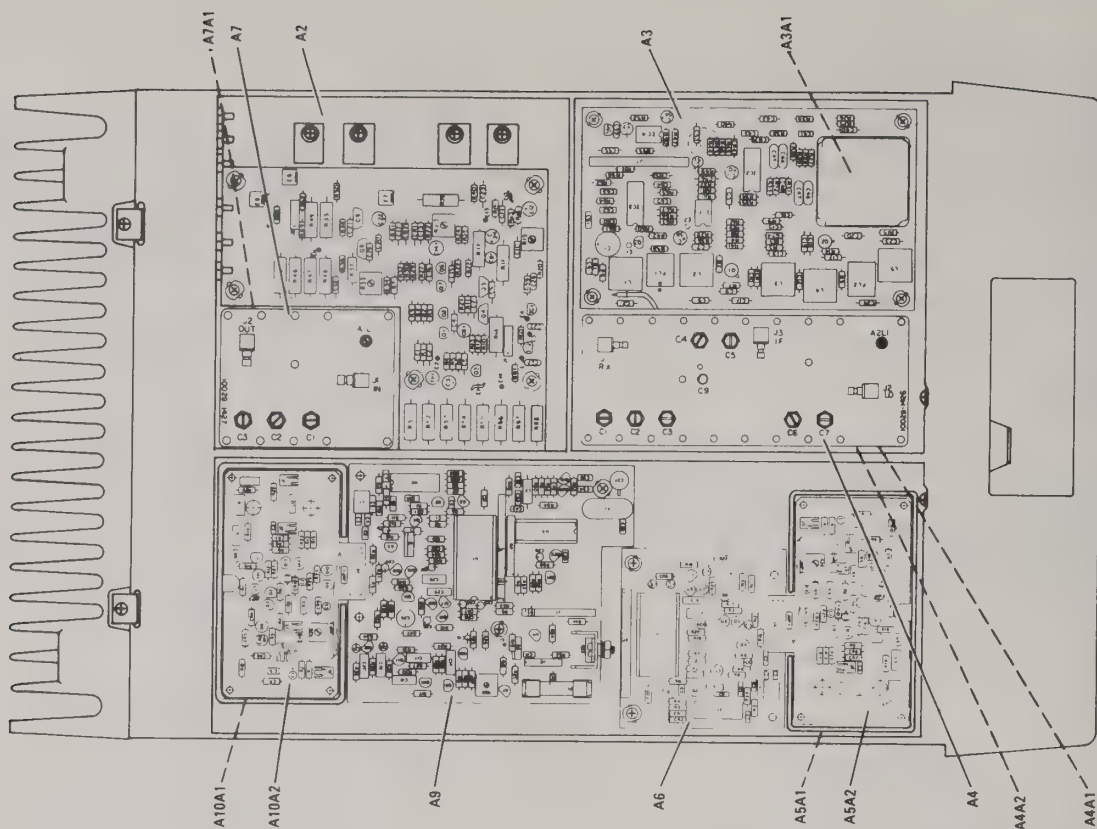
UHF Transceiver, Modules and Board Assemblies
